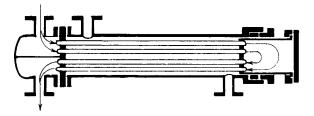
Outside Packed Stuffing Box Floating Head Exchanger (COURTESY OF PATTERSON-KELLEY CO.)
